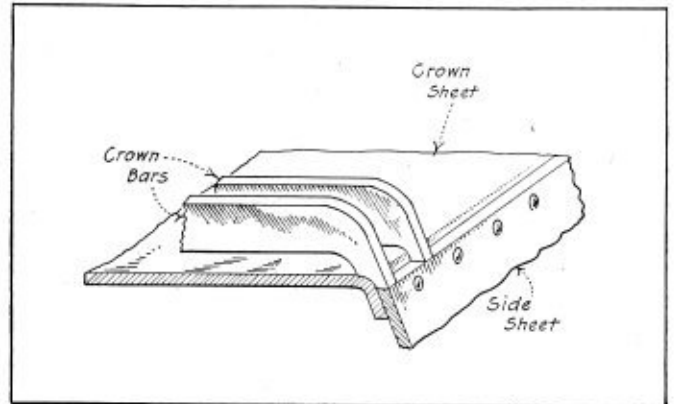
Sketch Showing How Crown Bars Rest on Crown Sheet and Side Sheet
